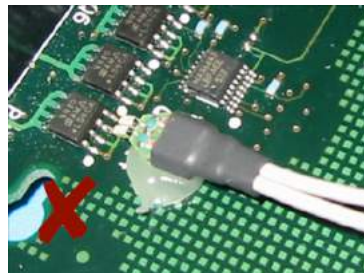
Incorrect Securing Method Because Glue is Placed on the Probe Head Tip
